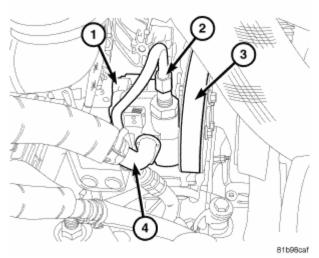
Identifying Power Steering Belt, Pressure Line & Power Steering Pump Mounting Bolts Courtesy of CHRYSLER LLC
